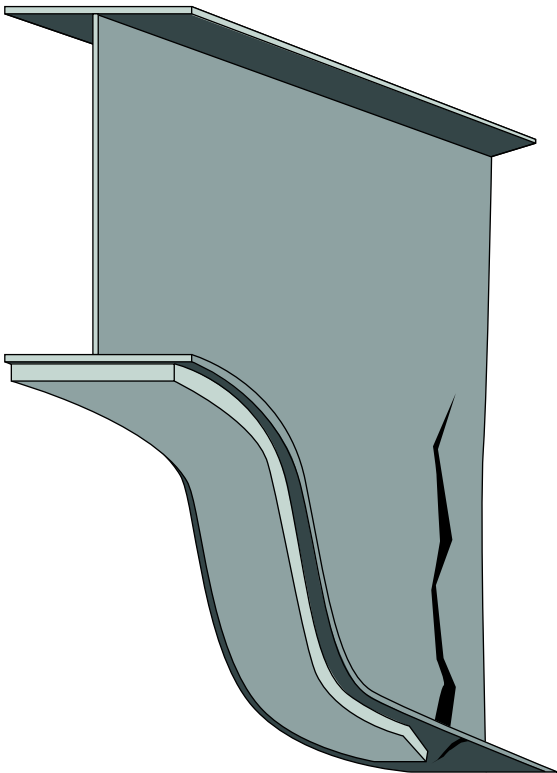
By redesigning the welded joints to be placed in low stress areas the fatigue life will be improved.
